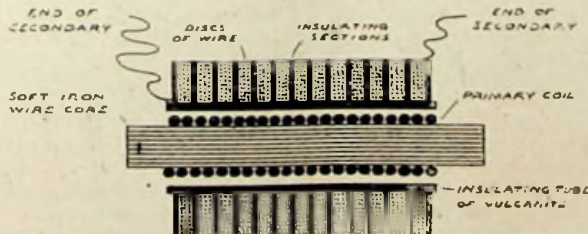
SECTIONAL METHOD OF WINDING A SPARK COIL.
